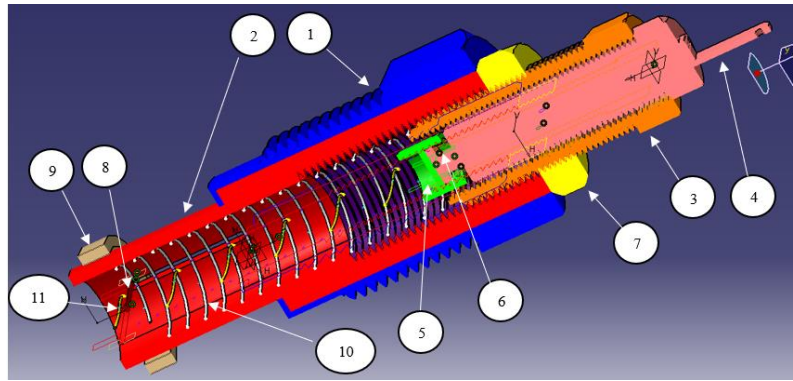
Section view to the parts assembly of the smart switch for the automatic cooling
